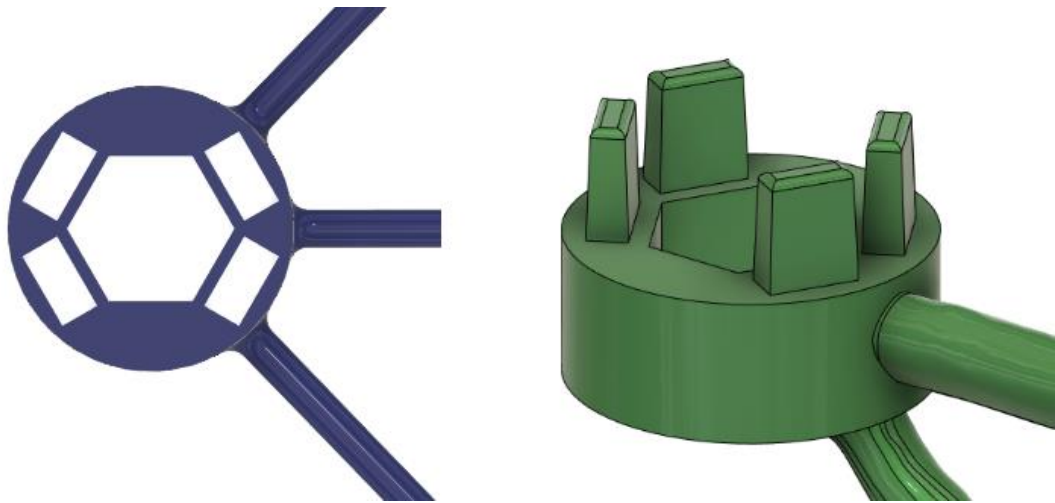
Tongue-and-groove joints of propeller guard with frame
